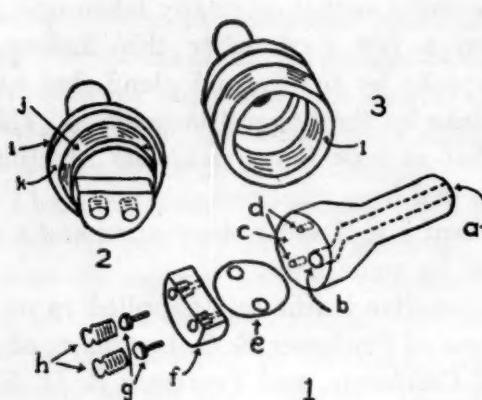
The check valves. 1. Valve No. 1 shown unassembled. 2. Valve No. 2 shown assembled. 3. Cap for valve No. 2.
